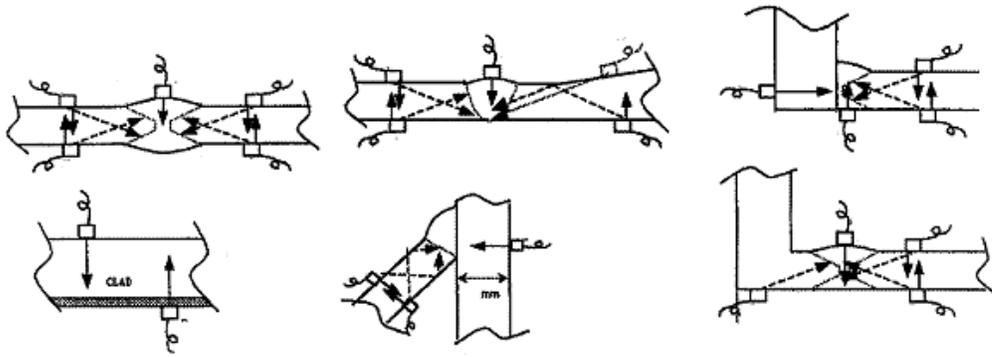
weld configuration and Directions/extend of scanning
